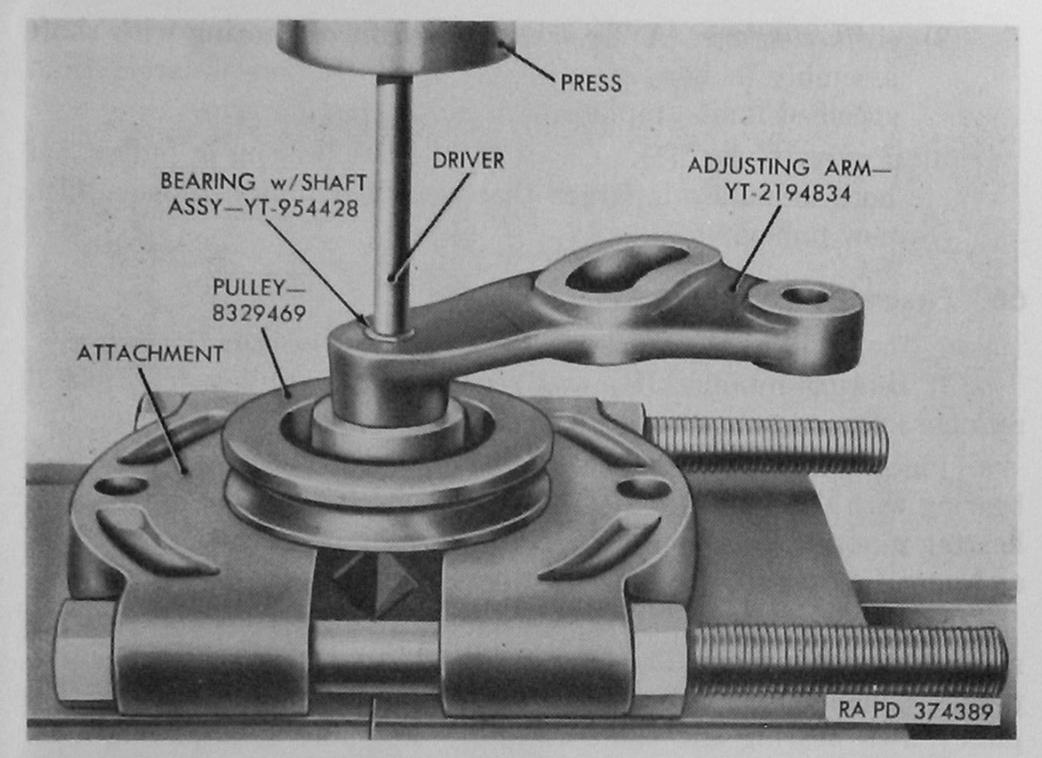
Pressing idler bearing with shat assembly from adjusting arm and pulley —engine assembly 8329440.
